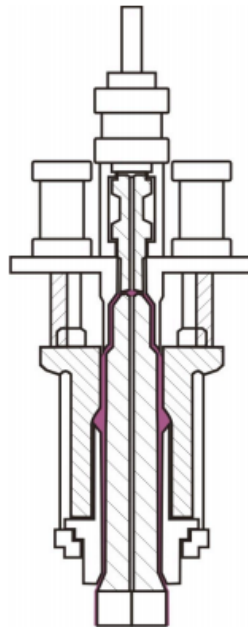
Frontal view of a typical extrusion head used for the manufacture of preforms.
